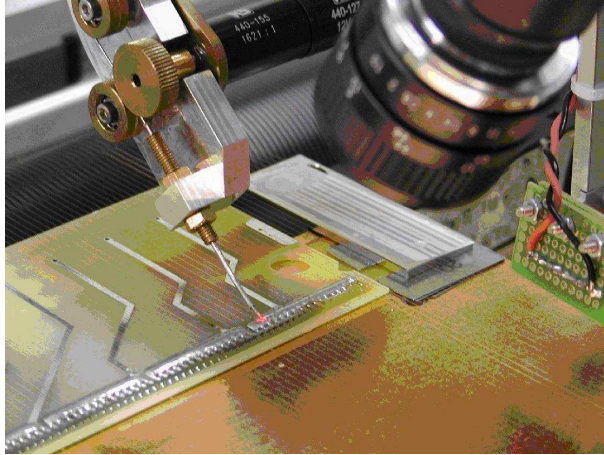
Soldering: the tin distributor and the laser beam guide light.
